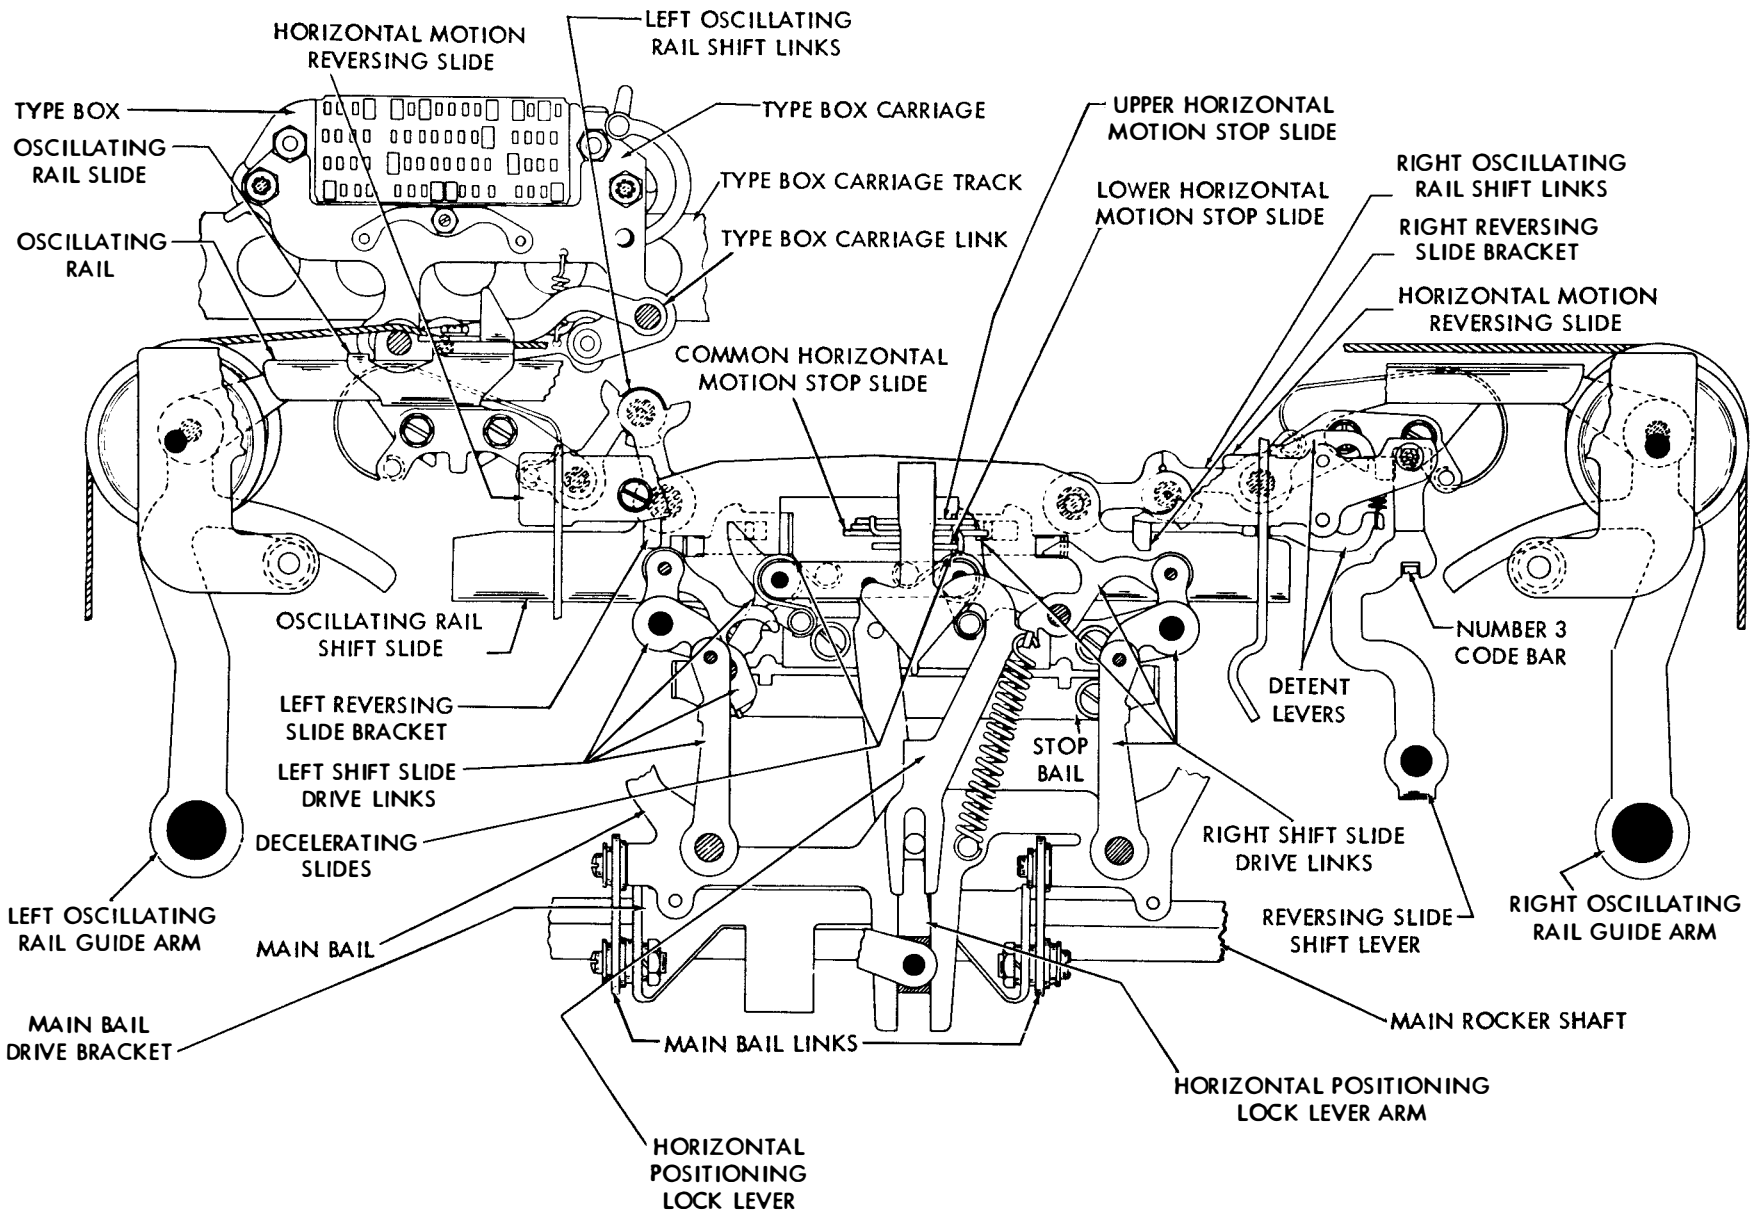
Front Plate Horizontal Positioning Mechanism
